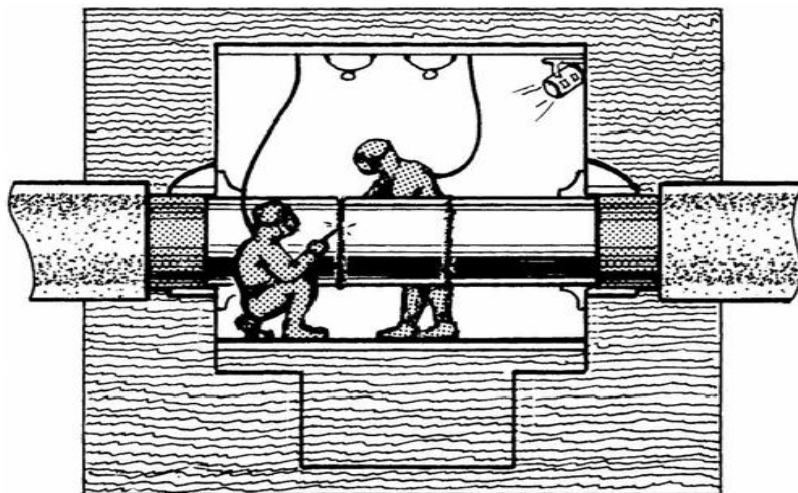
Schematic of underwater welding in a dry condition ⁷⁵
